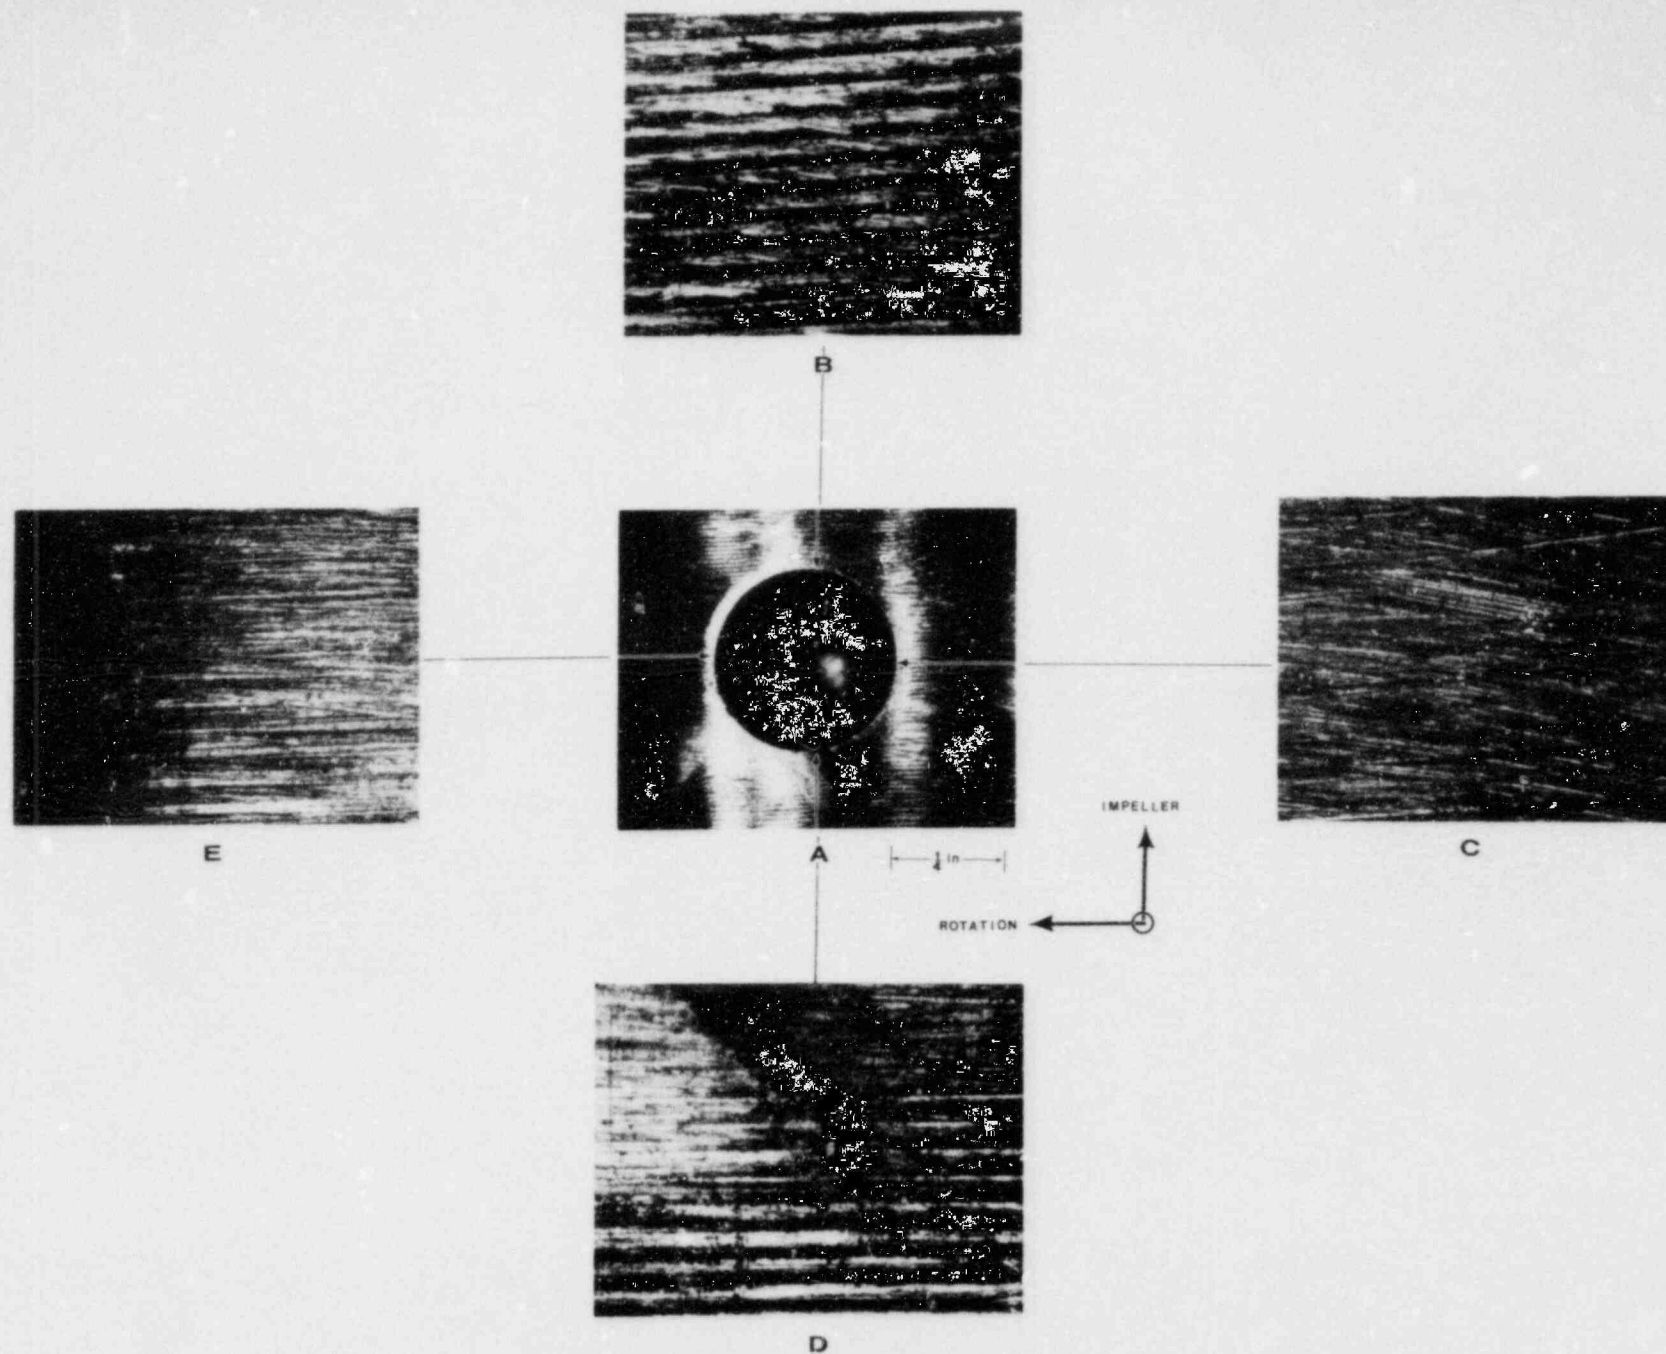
Shaft Surface Appearance Near Uncracked Pin Hole. View A Shows Pin Hole. Views B, C, D, and E Show Coarse Tooling Marks. Views C and E Show Wear Marks
